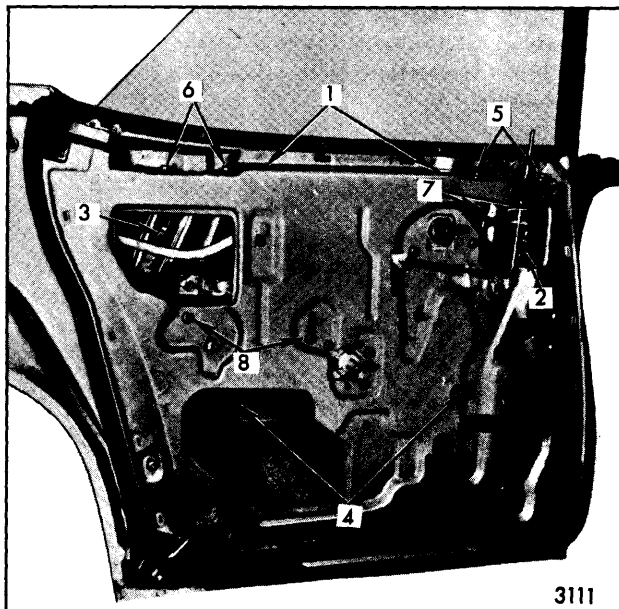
Rear Door Removal and Adjustments - “B-39” and “C-39, 49, and 69” Styles
